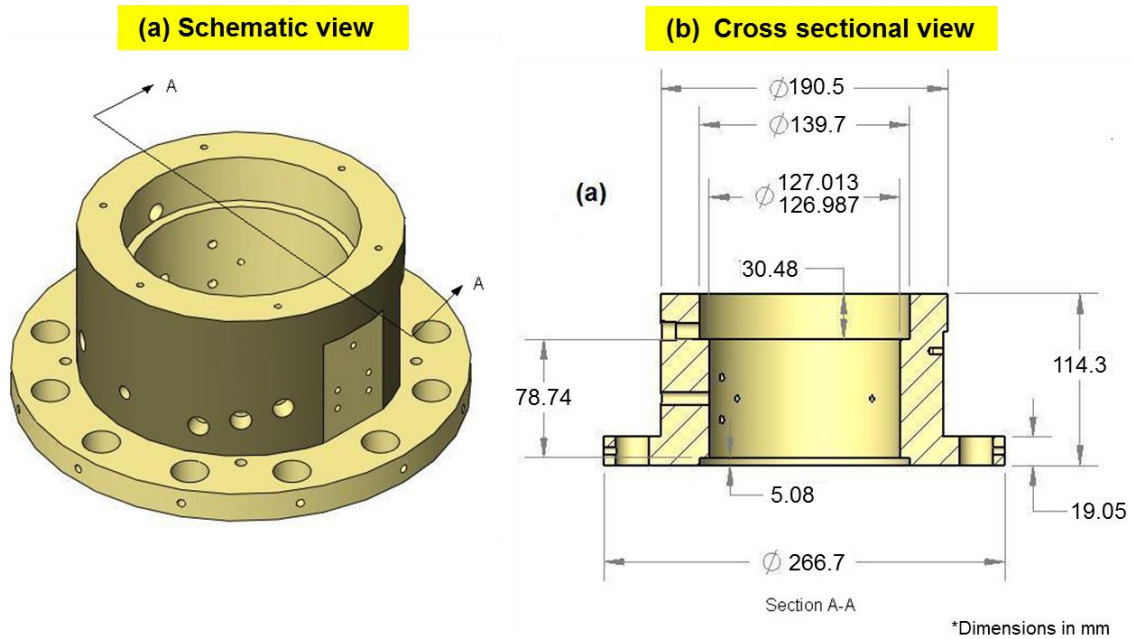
Bearing cartridge (a) isometric view, and (b) cross sectional view. (Material: AISI 1018 carbon steel)
